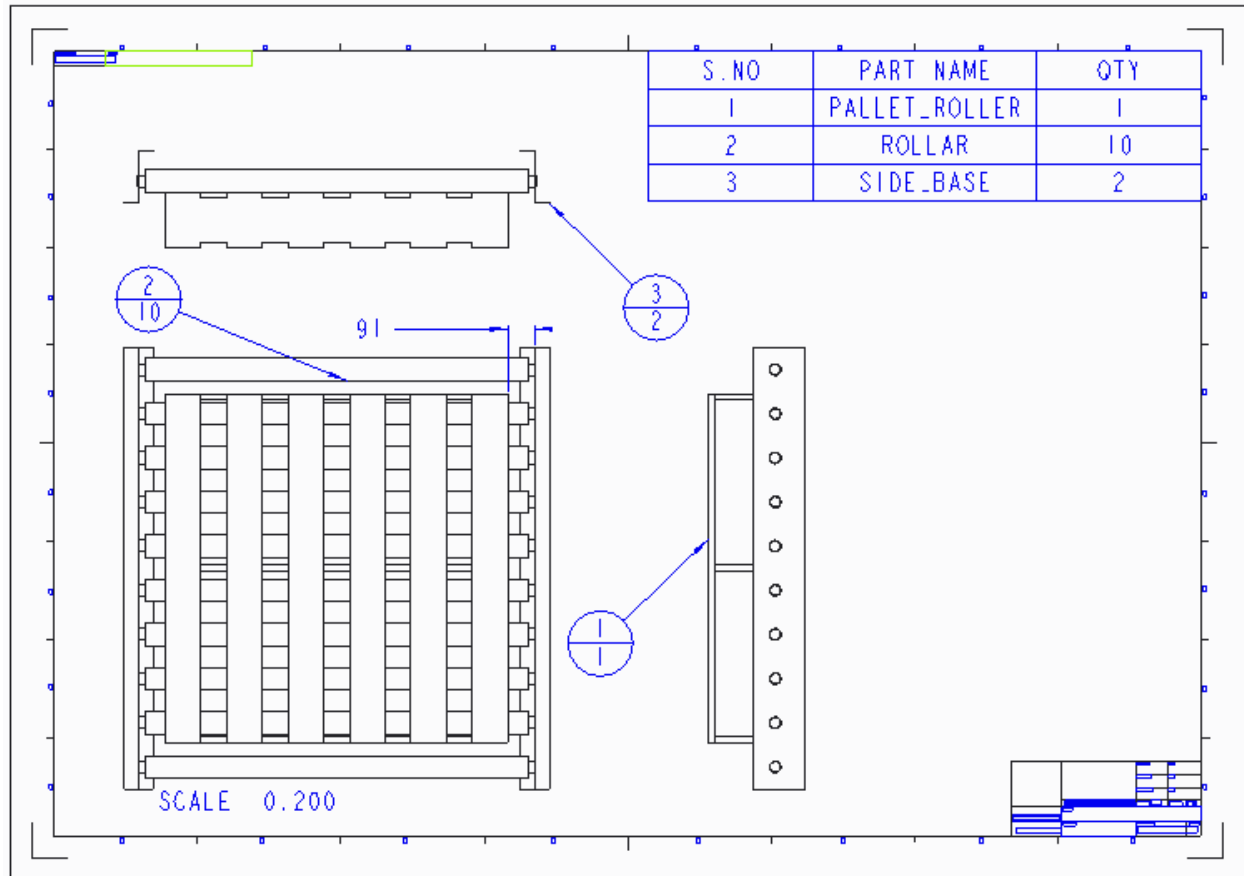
Drawing Specifications of Assembly of Roller Conveyor System
